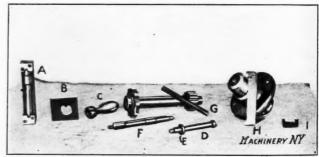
Gages for Testing the Parts of the Device shown in Fig. 5
